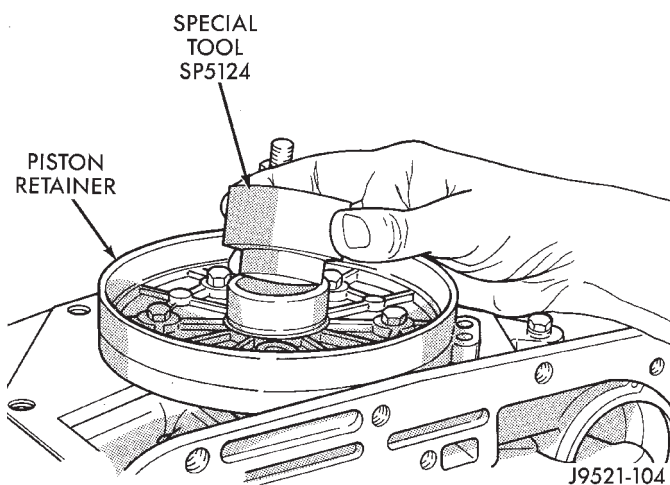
Positioning Adapter Tool In Overdrive Piston Retainer
